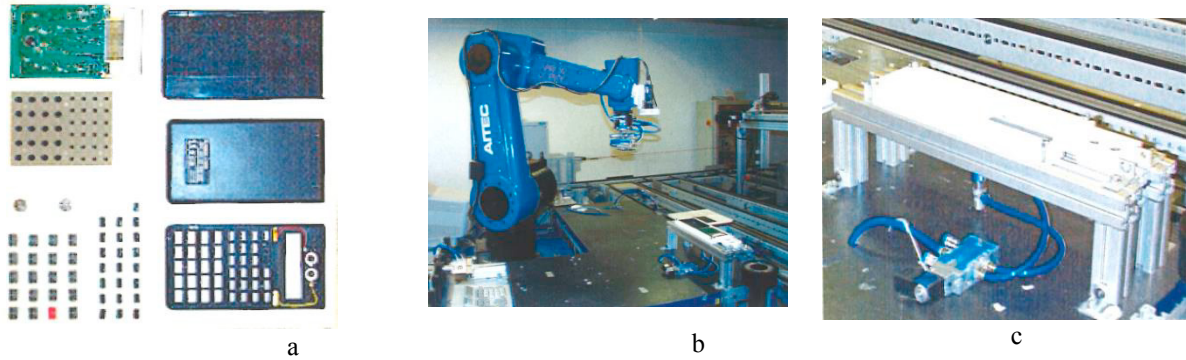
Assembly cell: (a) 49 components of the calculator, (b) Aitec robot, (c) Assembly station.
